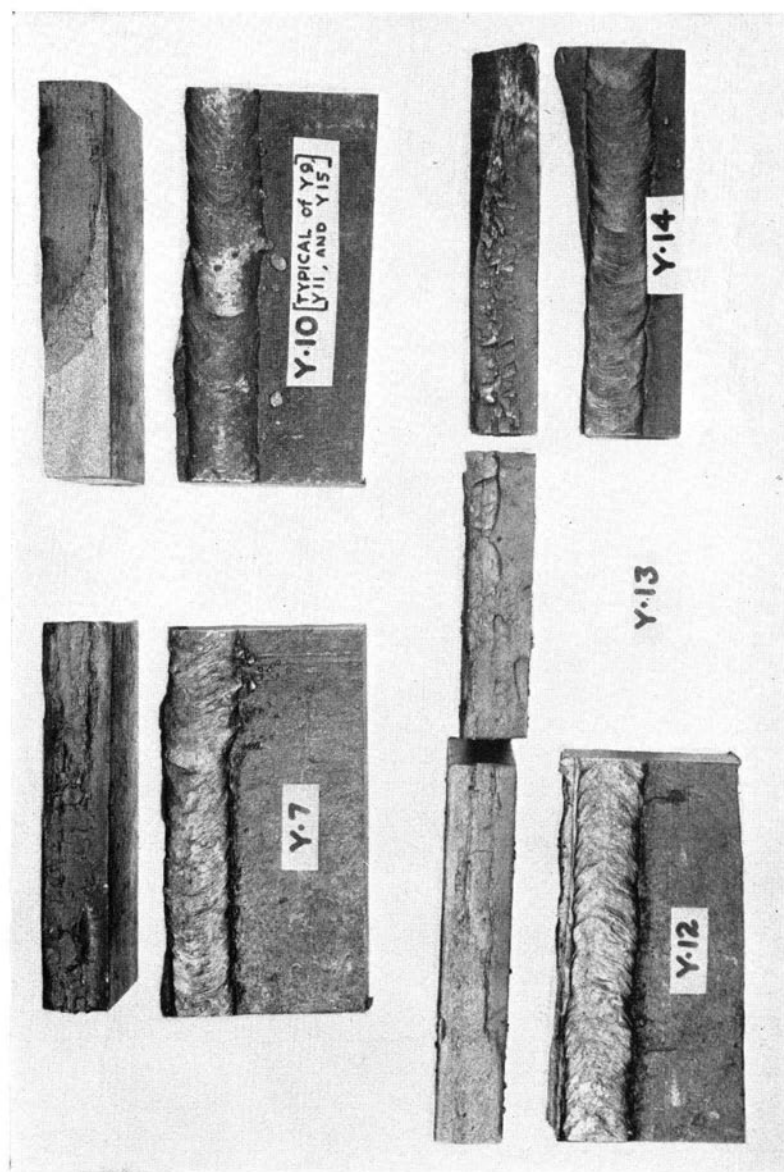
(b). FRACTURES OF THE Y SPECIMENS
